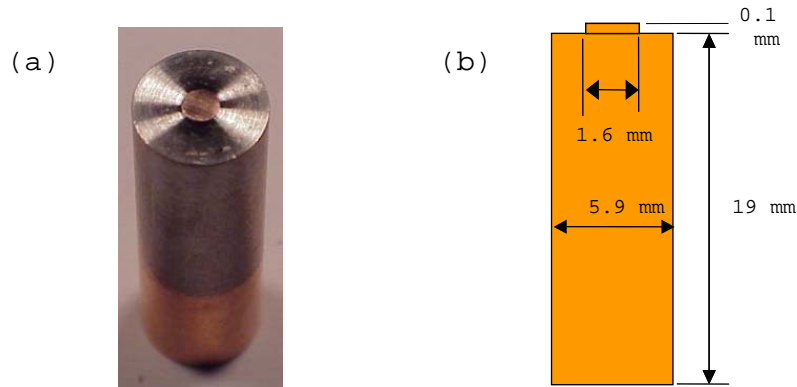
(a) Picture and (b) schematic of rod for ball-type joint following vapor deposit with bond pad exposed.
